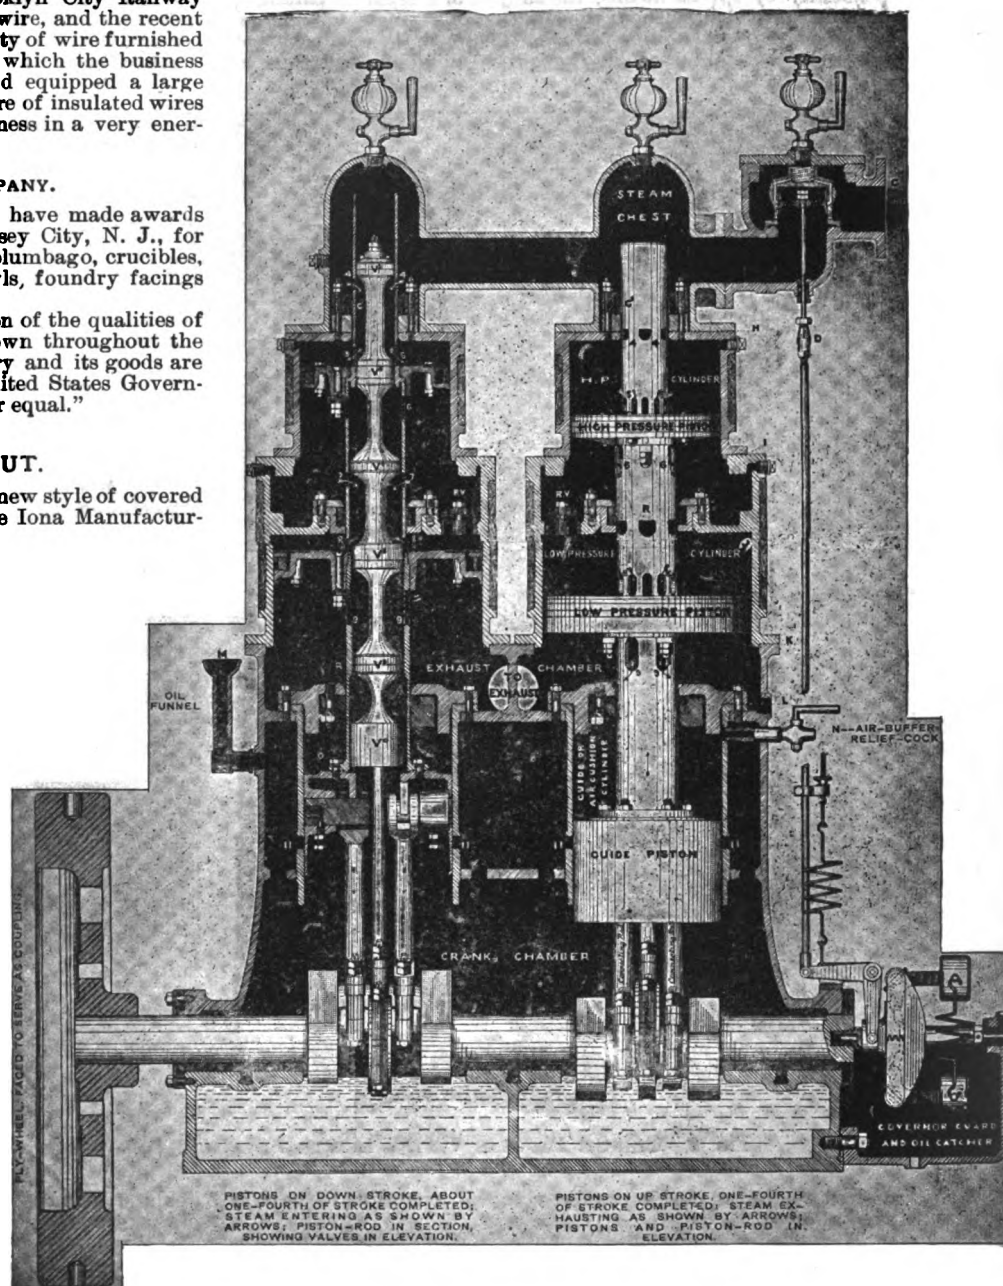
THE WILLANS CENTRAL VALVE ENGINE.
